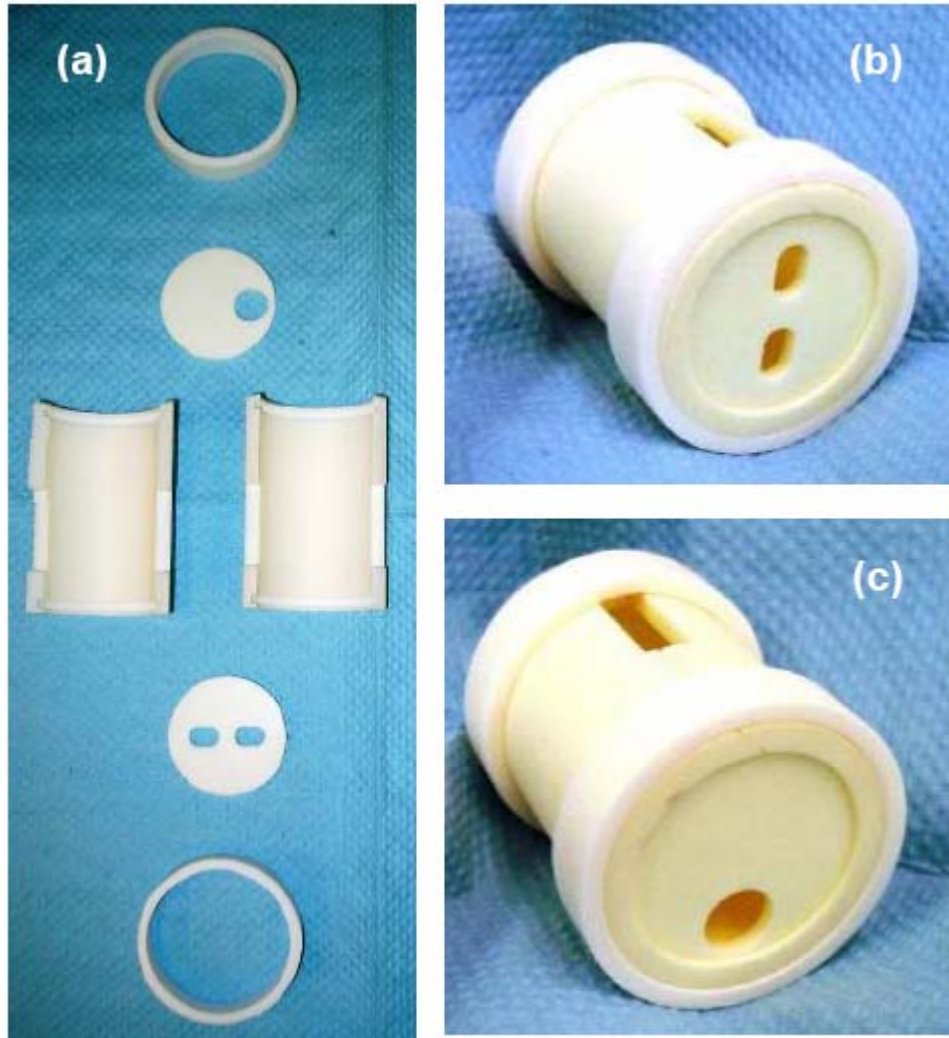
Alumina susceptor: (a) disassembled, (b) front view, (c) rear view.
